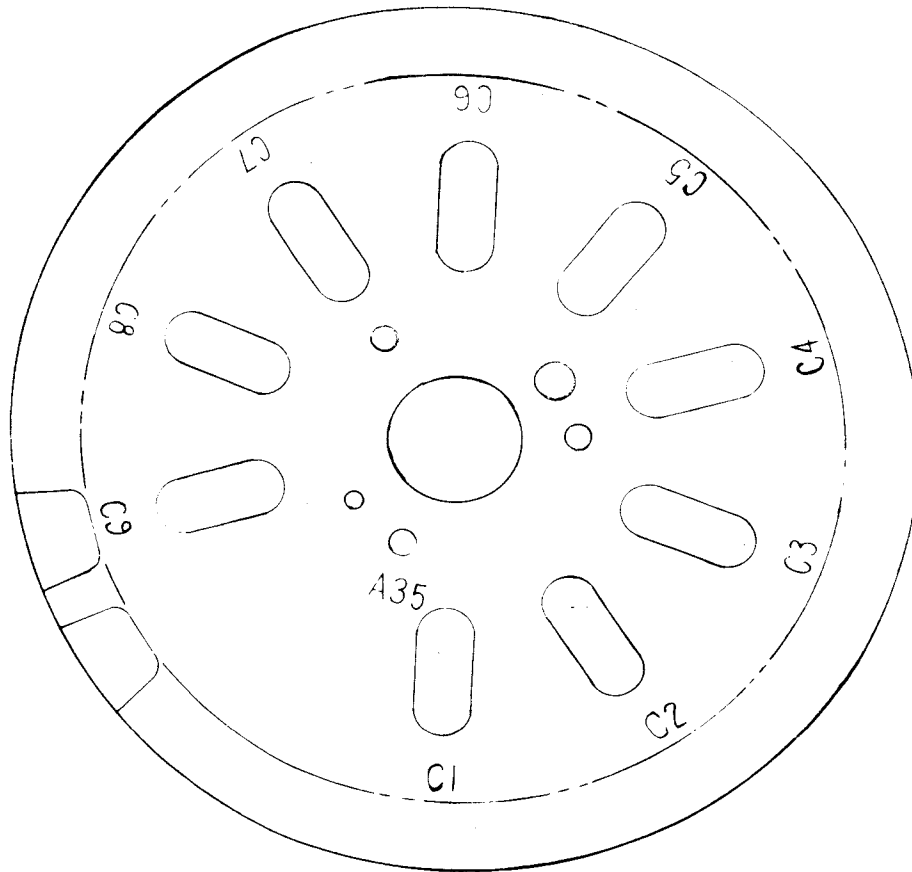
10 kHz Rotor Subassembly A2A4A35,
